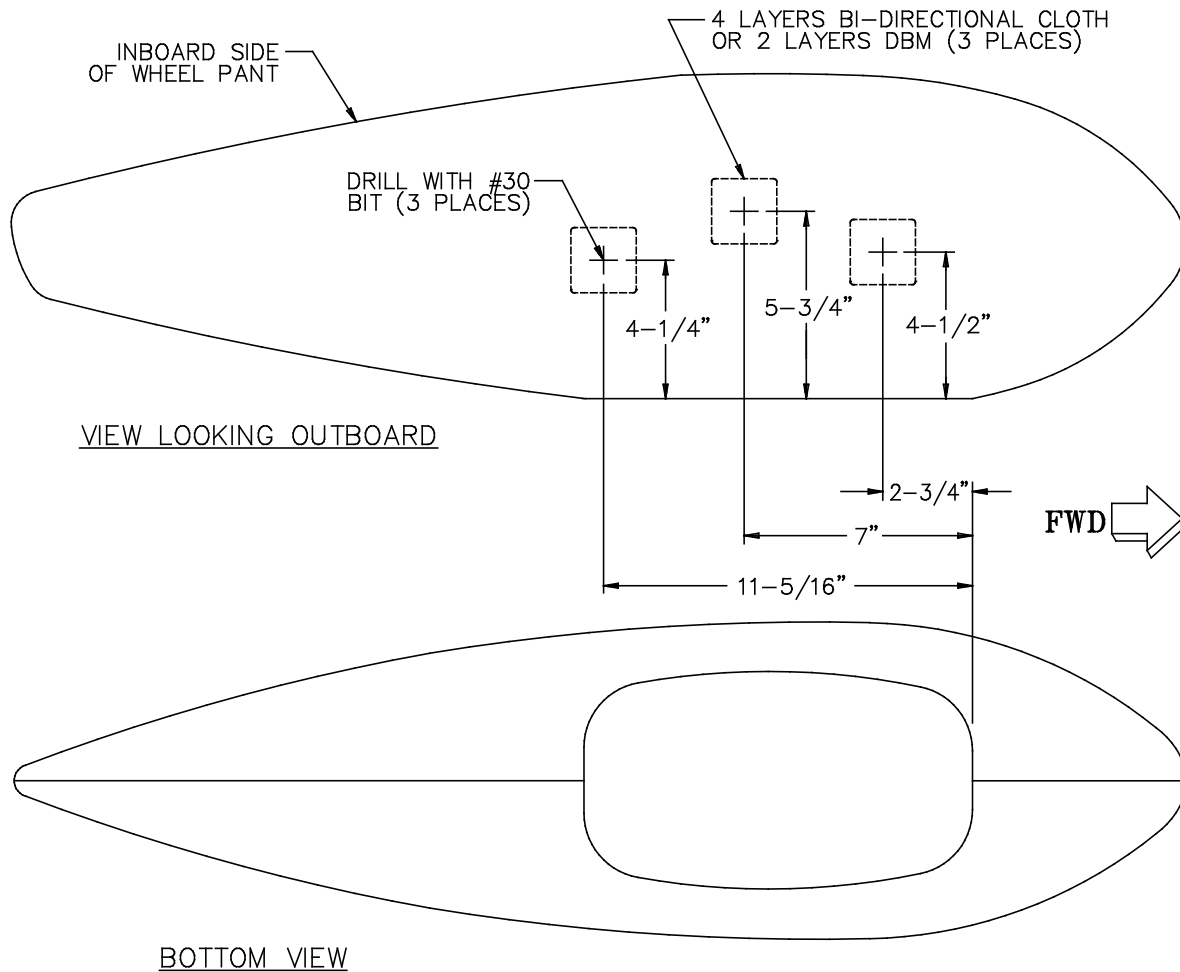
Drilling the Inboard Wheel Pant Mounting Screw Holes (Original Backing Plate Design)
